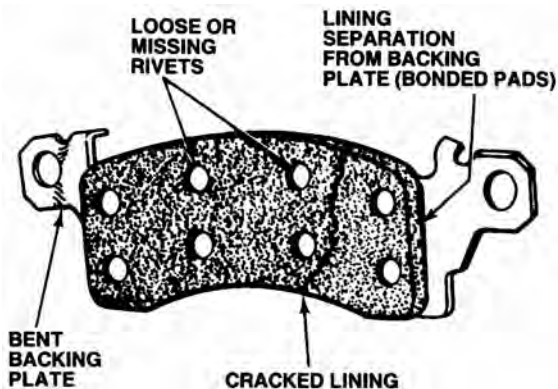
Inspect brake pads for physical damage, such as lining cracks, loose or missing rivets, backing plate distortion, or separation from the backing plate, as well as wear and fluid contamination.
